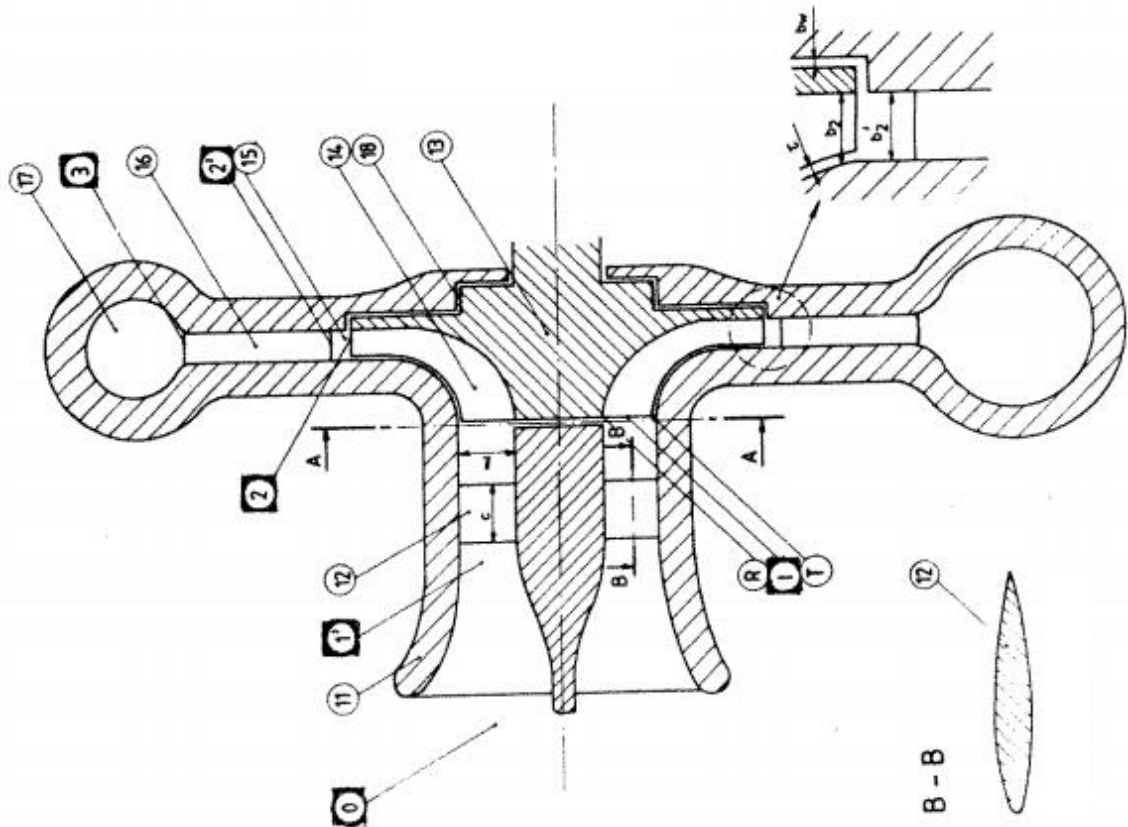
Cross-sectional view of a centrifugal compressor (Larjola 1987, 8)
